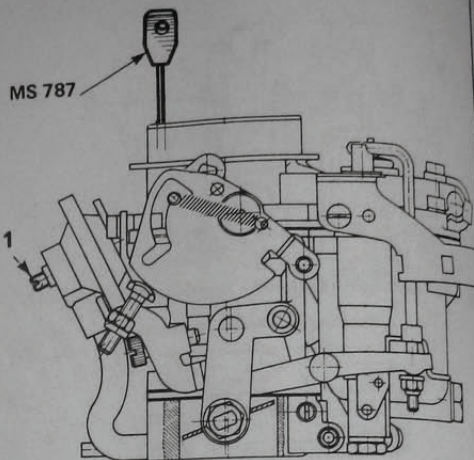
Pneumatic part open setting - Zenith carburettor (Sec 17)
